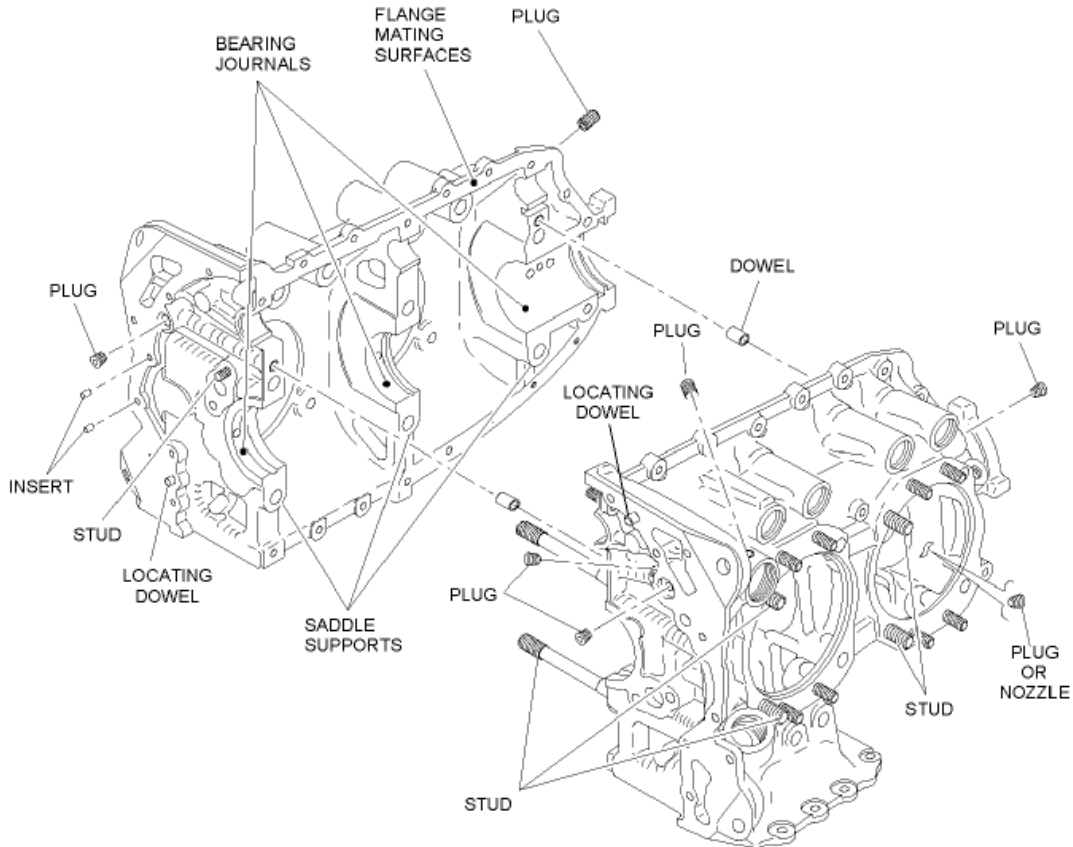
• Crankcase Bearing and Flange Surfaces
